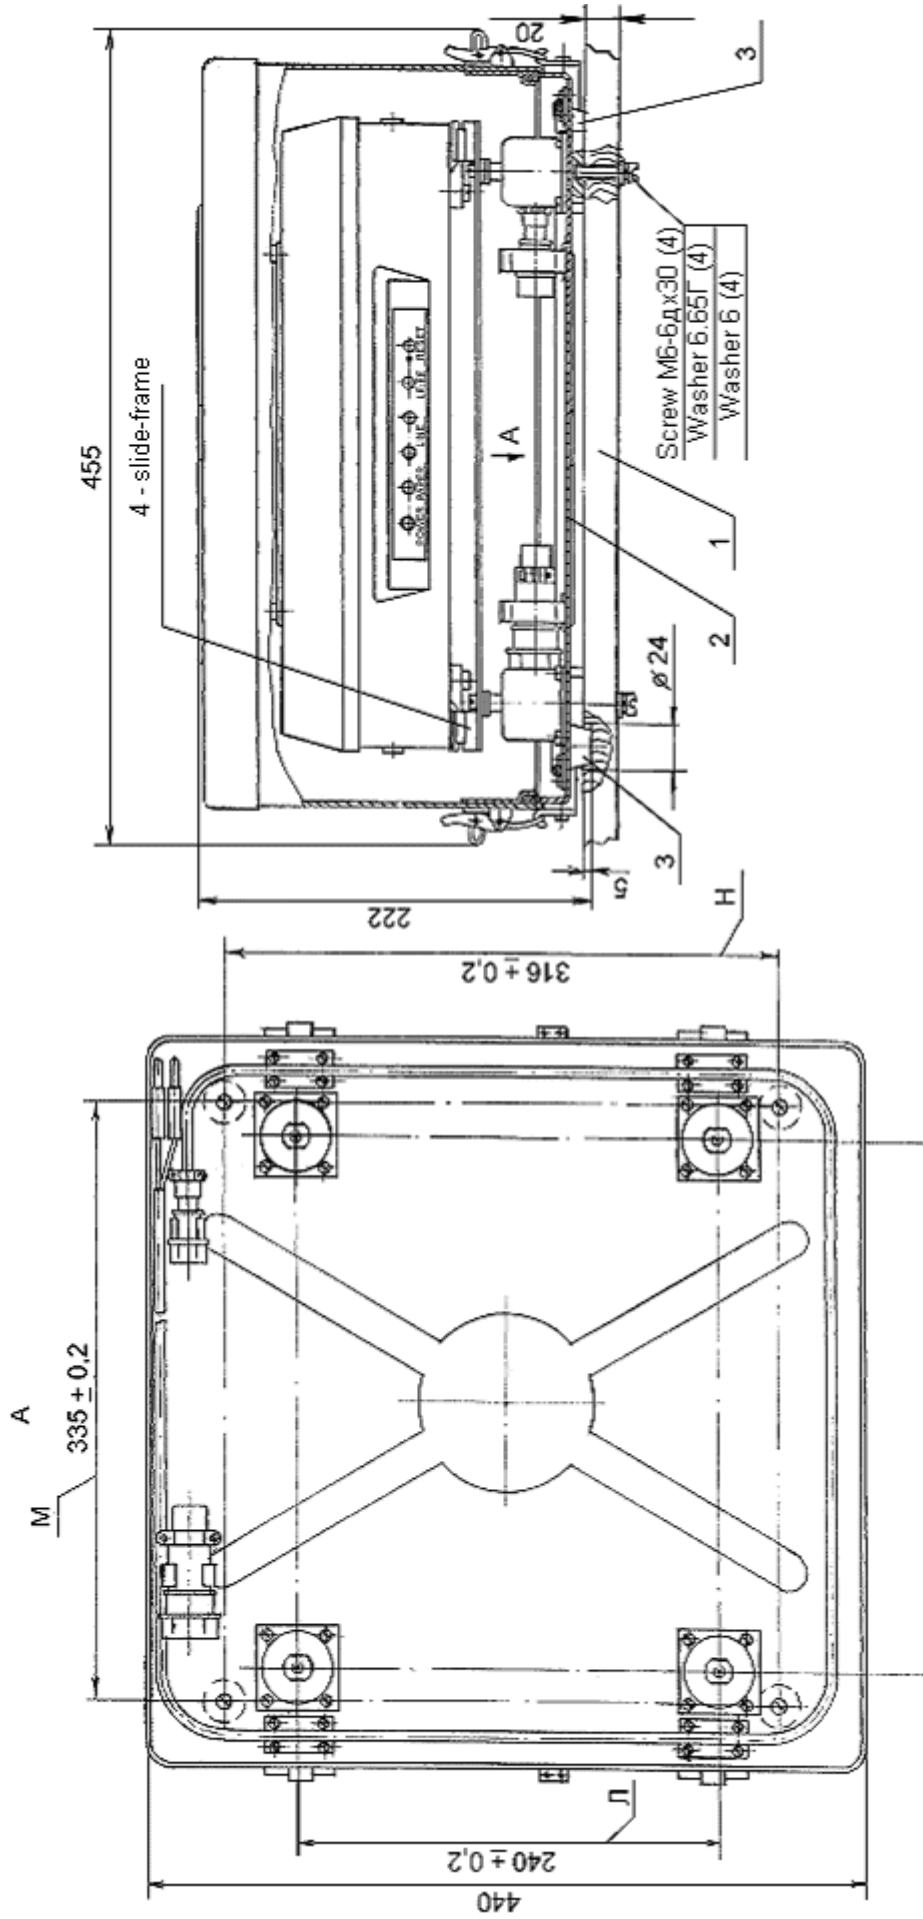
УД-M512Э mounting using housing case bottom and a slide-frame
